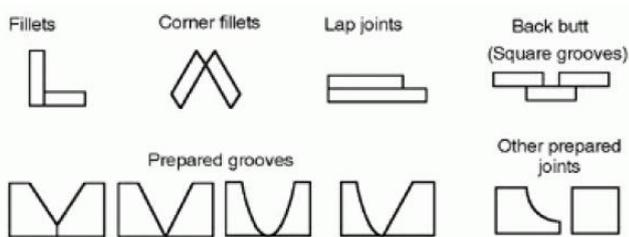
Recommended welding grooves for seam tracking, image source: FANUC [4]
